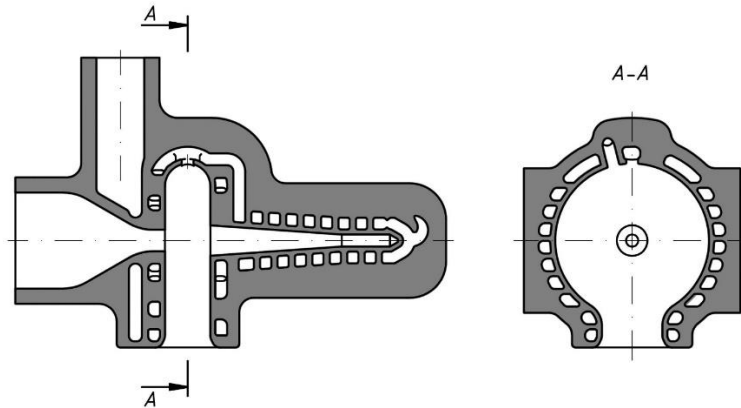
Cross-sectional views of an igniter with  $d=1.8$  mm.
